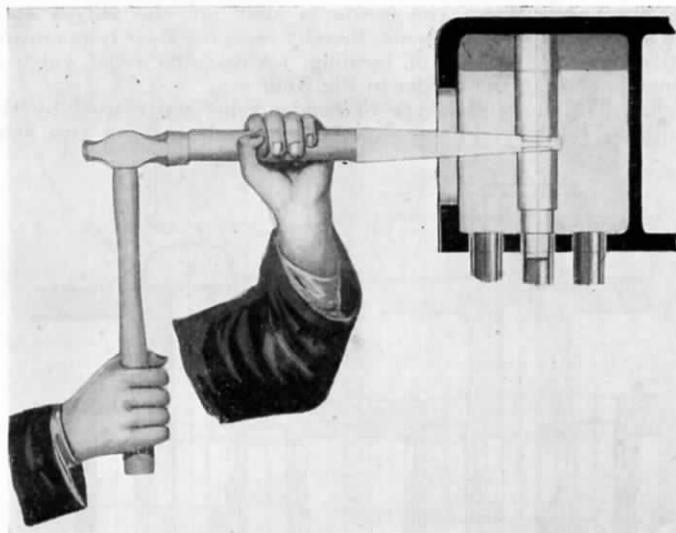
METHOD OF EXTRACTING SUPERHEATER TUBES.
